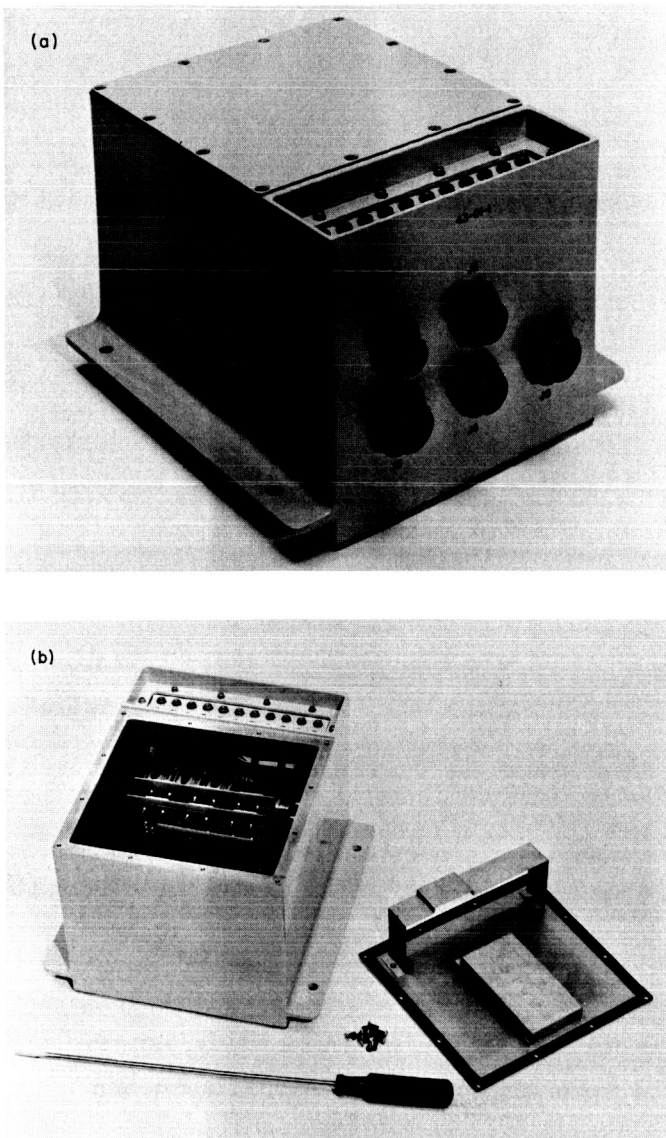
Views of conditioner assembly: (a) exterior; (b) interior, top cover removed
